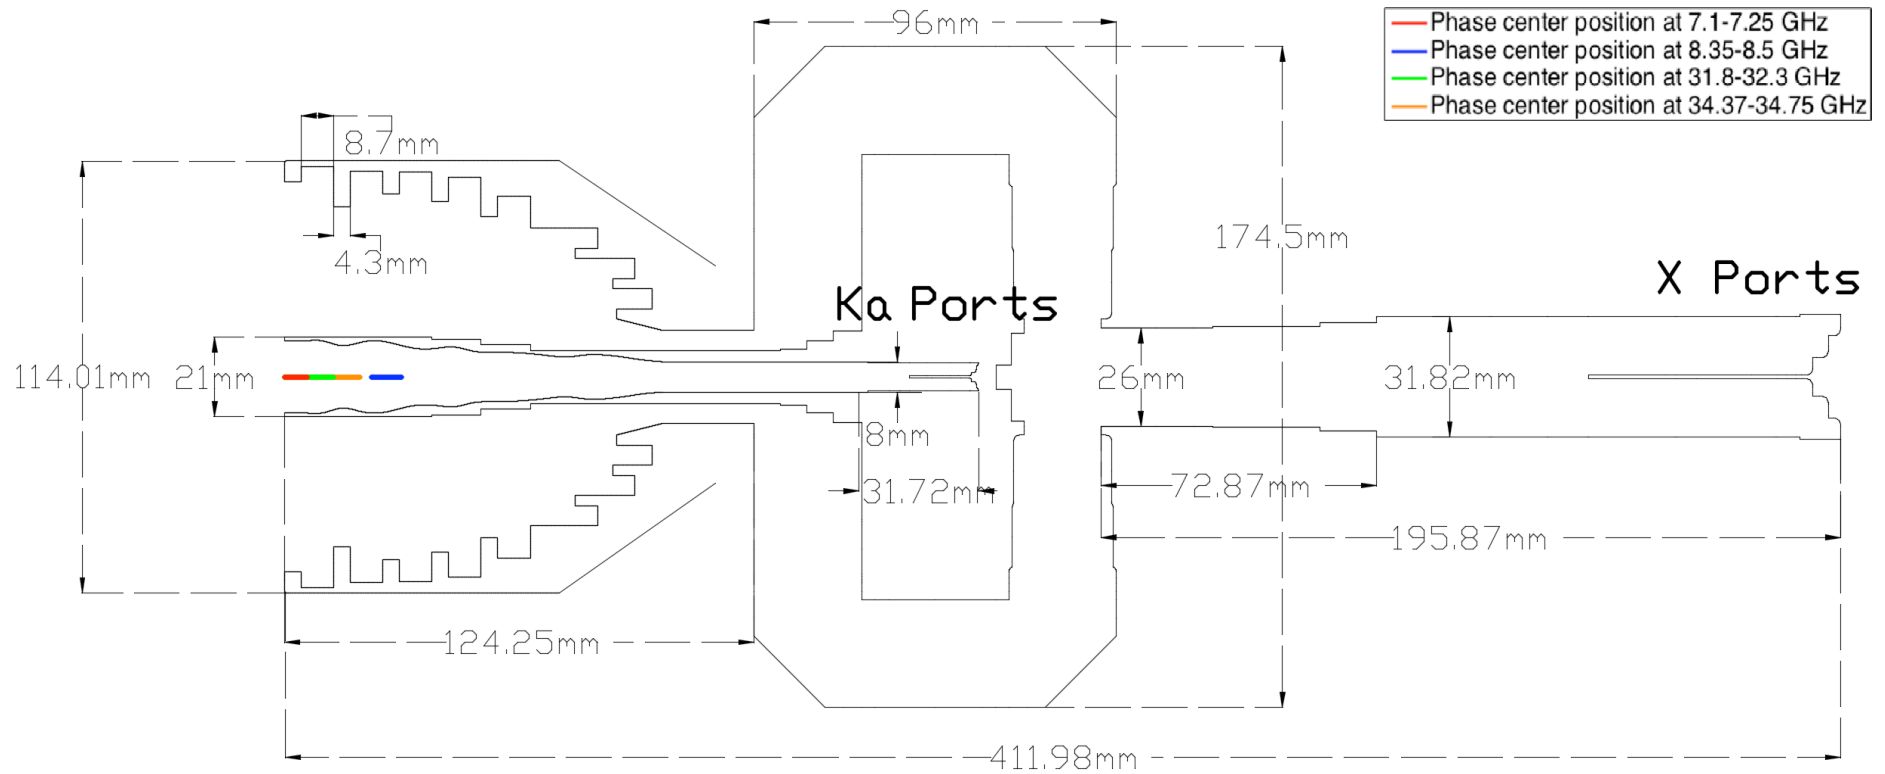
Phasecenter and Dimensions of the Final Global Design
